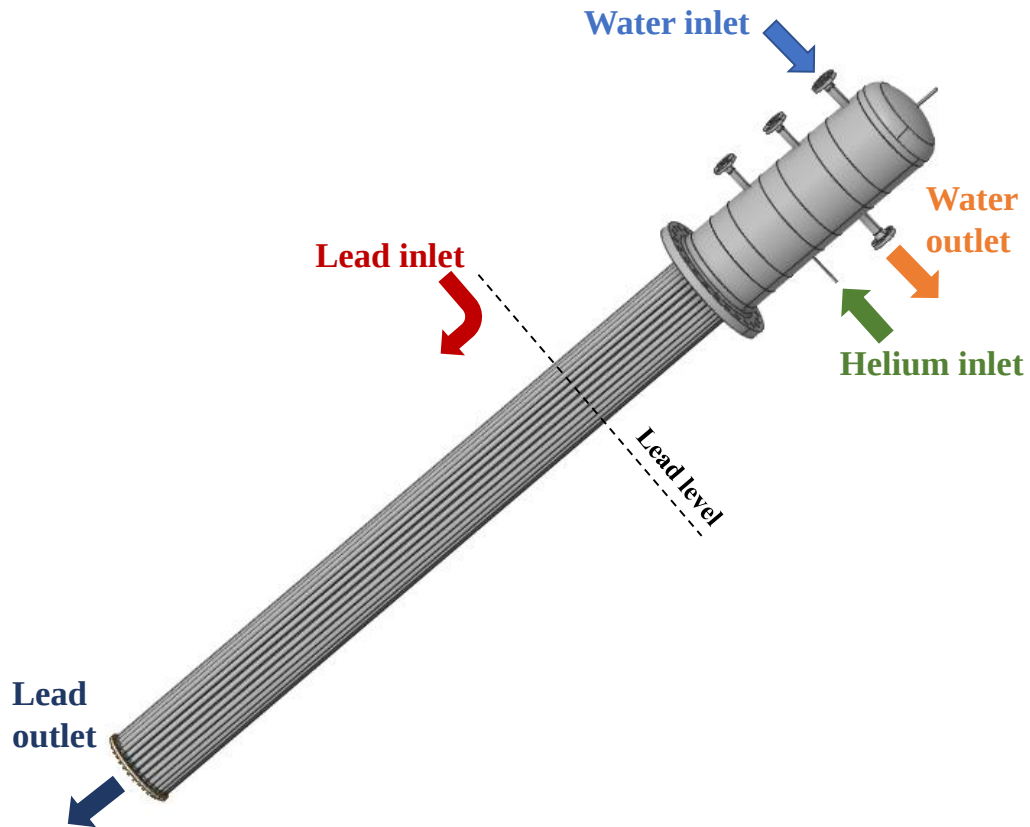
3D drawing of the ATHENA main heat exchanger
